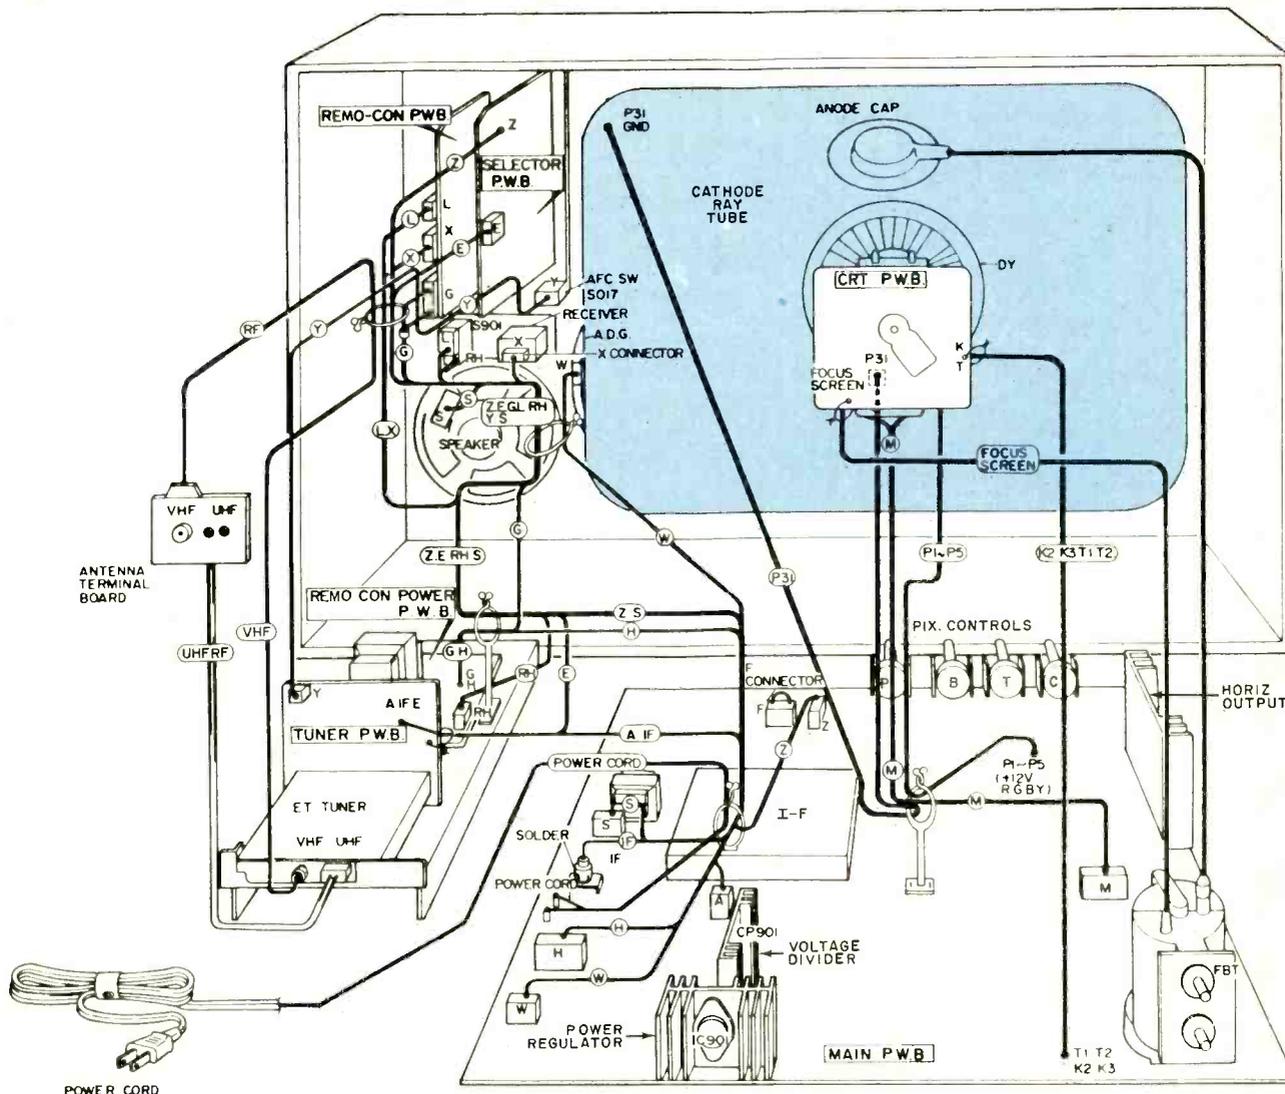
Rear view of the CI1306 showing approximate location and wiring of major components and chassis.
